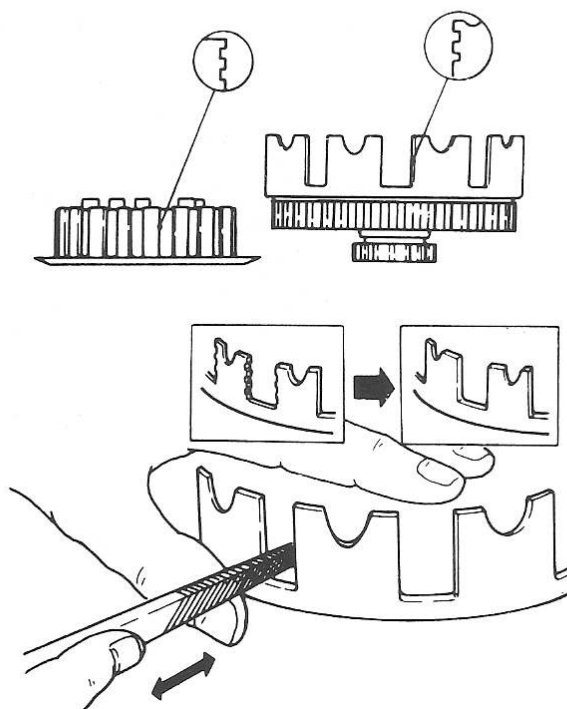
A.14 If the indentations in the clutch housing tabs are slight, they can be removed with a file and the housing won't require replacement (Sec 12)
